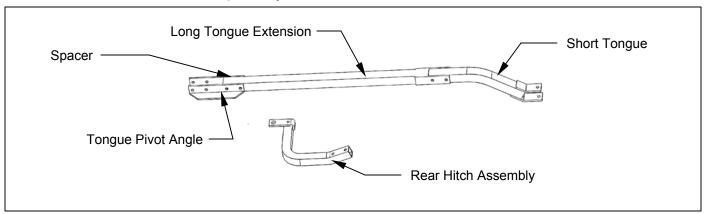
Long Tongue Assembly and Rear Hitch Assembly
